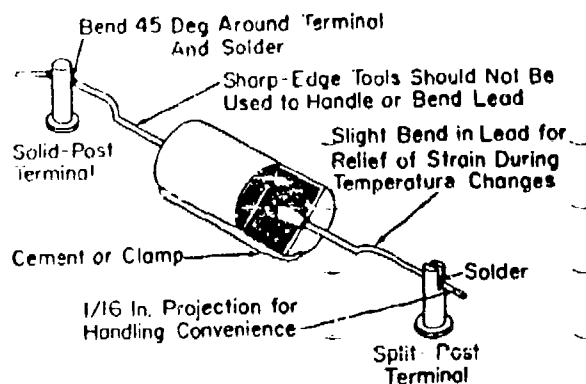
Proper mounting technique for lead-mounted capacitor or resistor./19/
